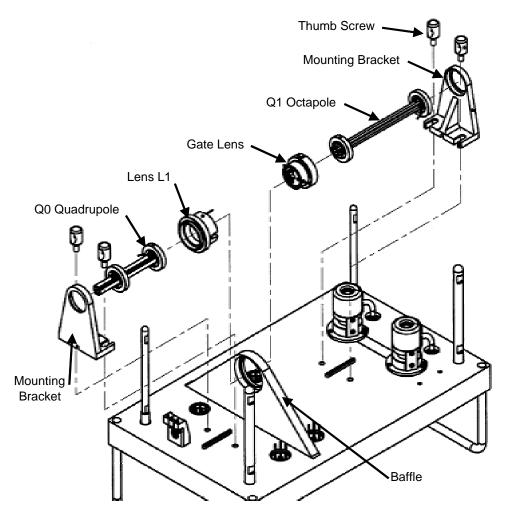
Exploded view of the Q0 and Q1 ion guides
